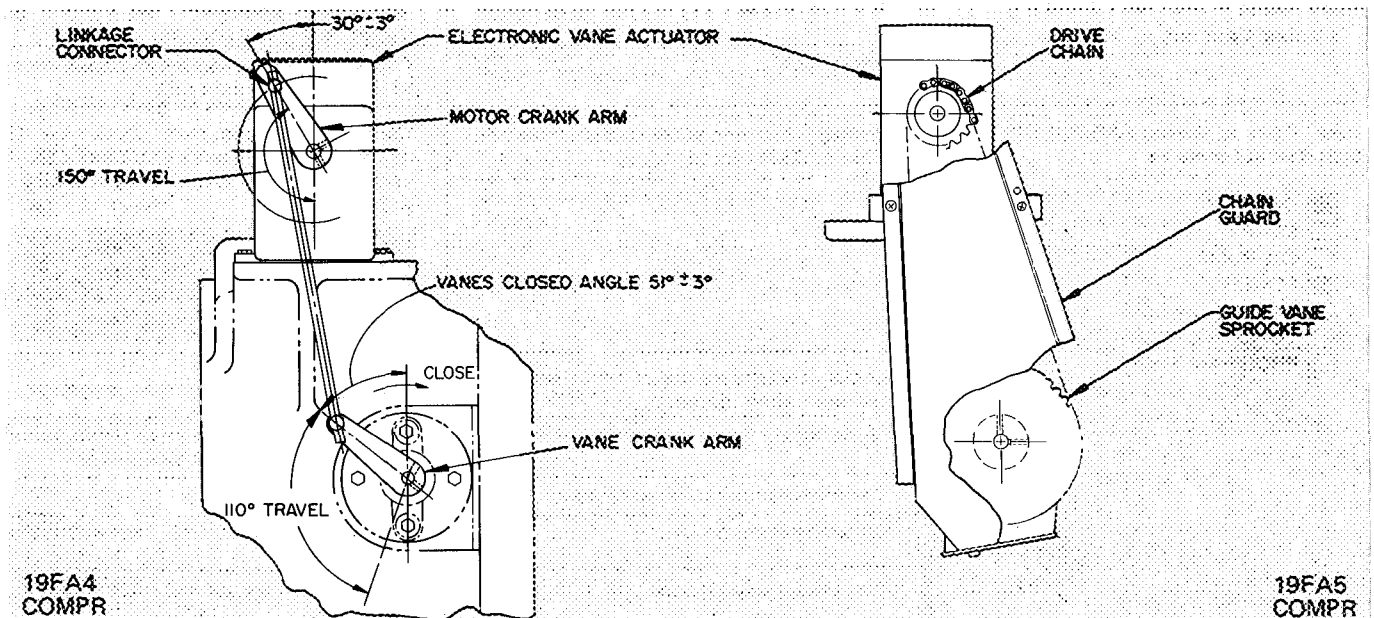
Compressor Guide Vane Linkage (Electronic)
